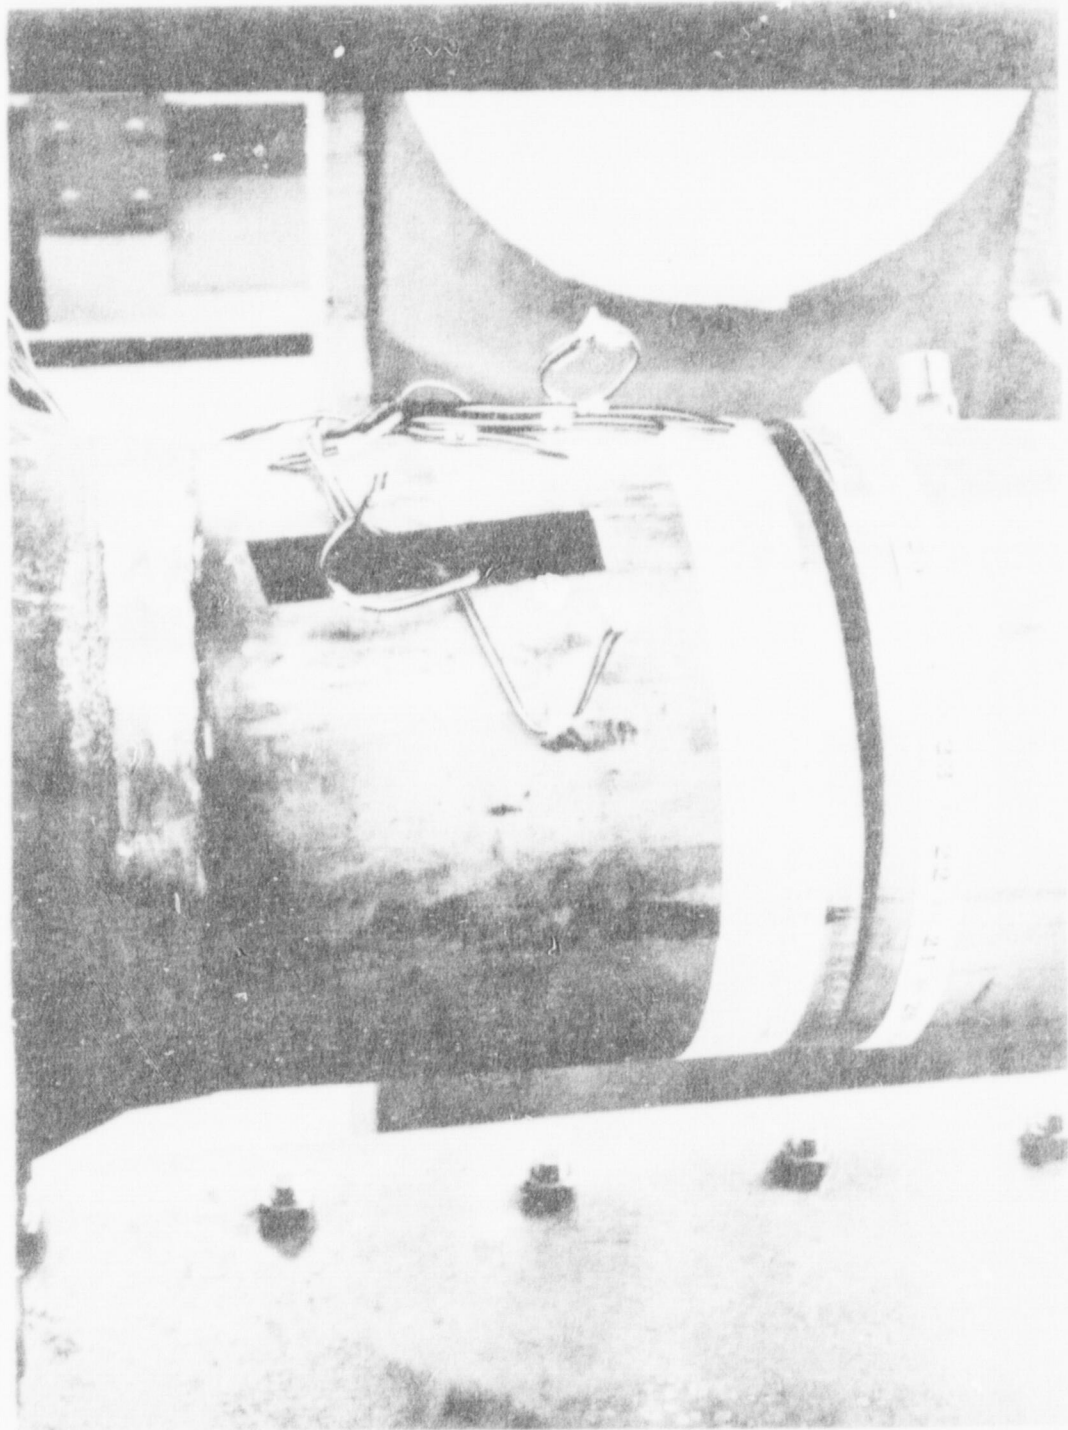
FINAL FRACTURE, STAINLESS STEEL, ROOM TEMPERATURE (CSS-25)<sup>(36)</sup>
